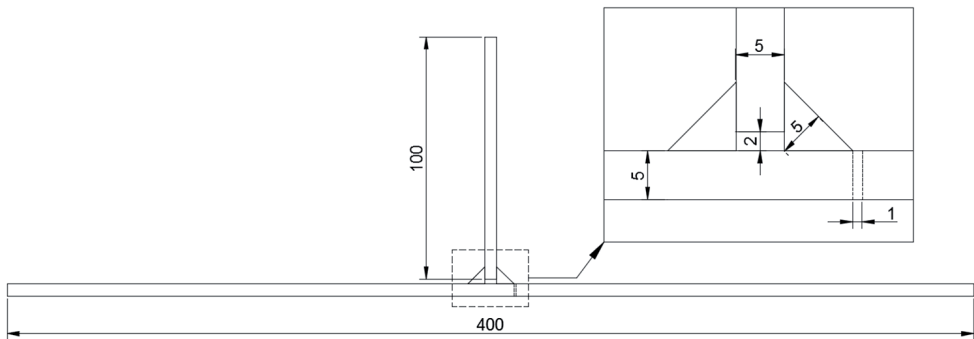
Cross section of double-sided and not fully penetrated fillet welded T-joint with through thickness crack at one weld toe.
